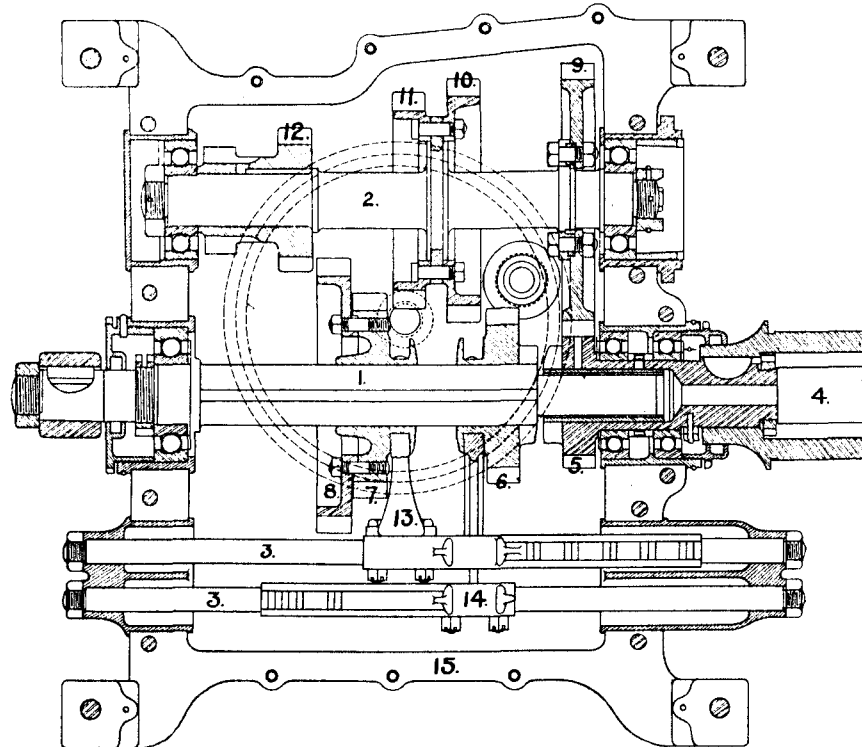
TRANSMISSION AND GEAR SHIFTING
